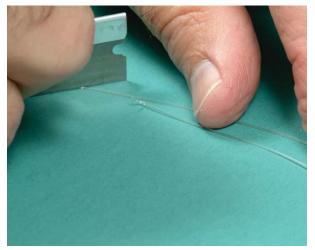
Cutting the nylon cord at an angle makes it easier to thread through the holes in the frame and allows it to seat smoothly in the groove under the lens.
